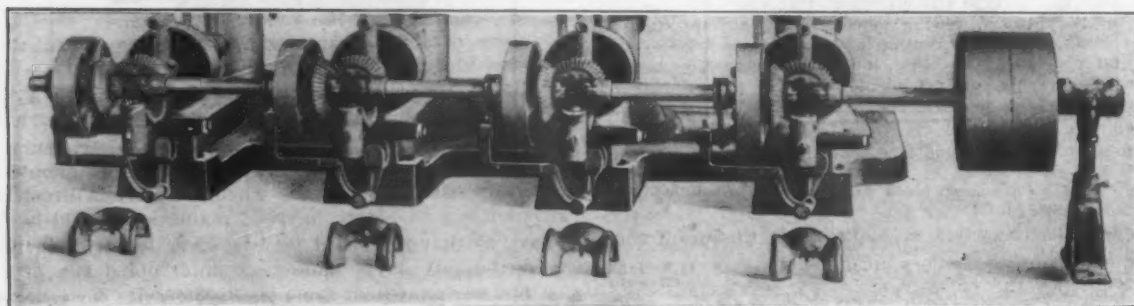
Rear View of the Countershaft of a Four-Spindle Drill.
